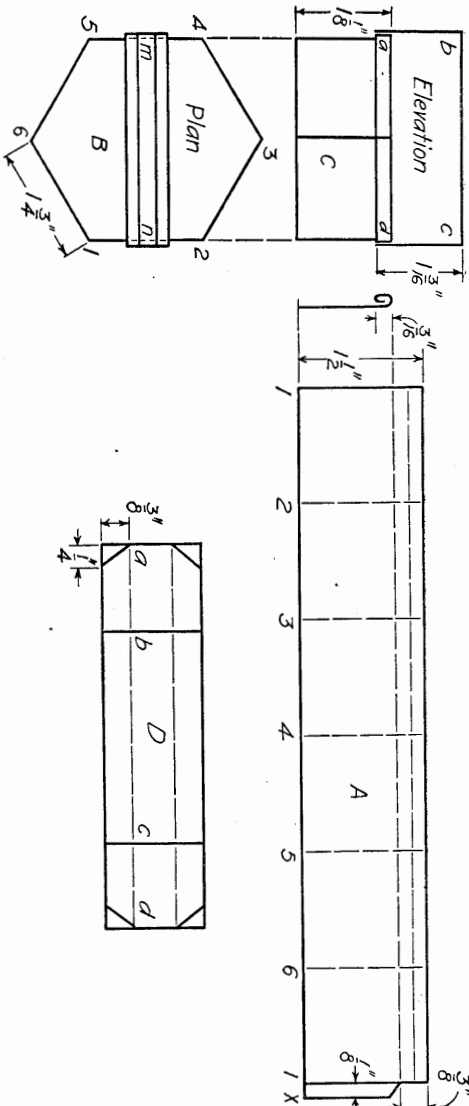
Plan, Side View, and Pattern of Hexagon-Shaped Cake Cutter.
